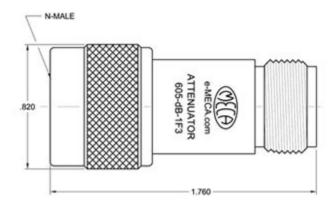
Attenuator Detail View Showing a Standard N-Type Plug and Jack
